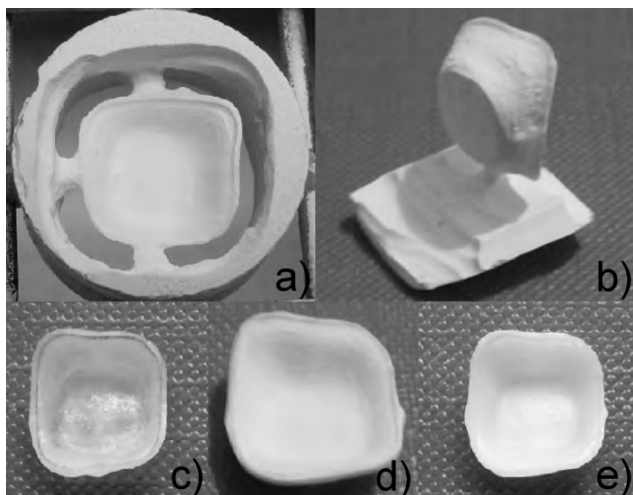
Dental crown substructure in successive stages of 3Y-TZP-A-900 bisque processing: a) bisque in milling fixture, b) bisque removed from fixture, c) resin model of substructure, d) bisque before sintering, d) substructure after sintering for 2 h at 1400°C; parts in c), d) and e) are presented on same scale for comparison purposes among sizes of resin model and substructures before and after sintering. Substructures made of 3Y-TZP-900 bisque were qualitatively similar to 3Y-TZP-A-900 counterparts. In case of ICE Zirconia, smoother edges of detail both in green and sintered state were observed as sole differences
